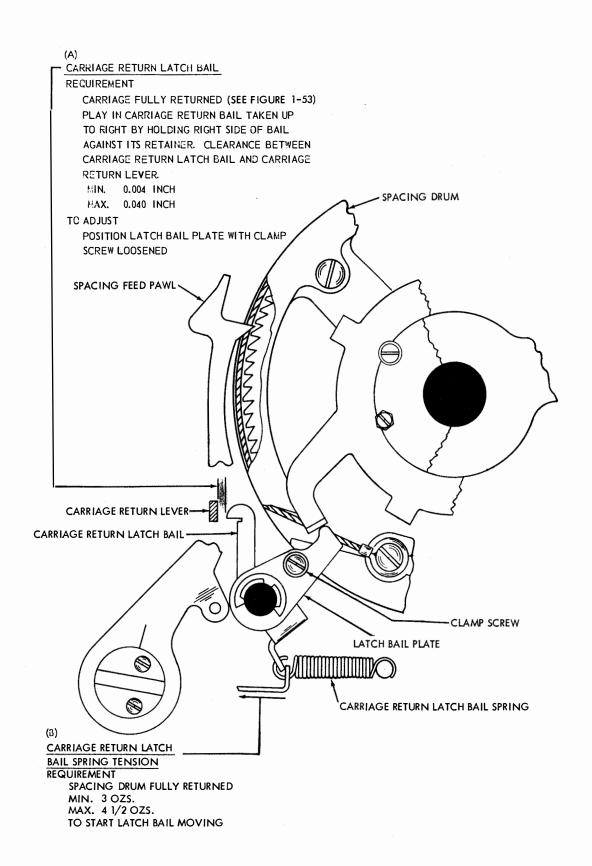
TYPING UNIT, CARRIAGE RETURN MECHANISM, FRONT VIEW
